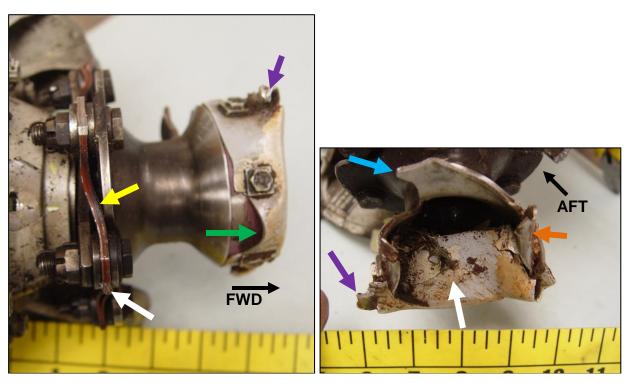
The rear drive shaft connection to the tail gearbox with the shaft rotated 180-degrees (left) and a view of the forward end of the drive shaft (right).
